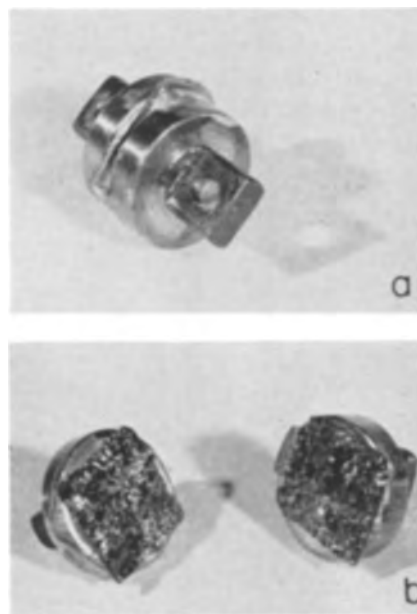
(a). Sample with heavy caps ready for tensile strength tests; FIG. 5(b). Sample after test showing the fractured silicon surface.
